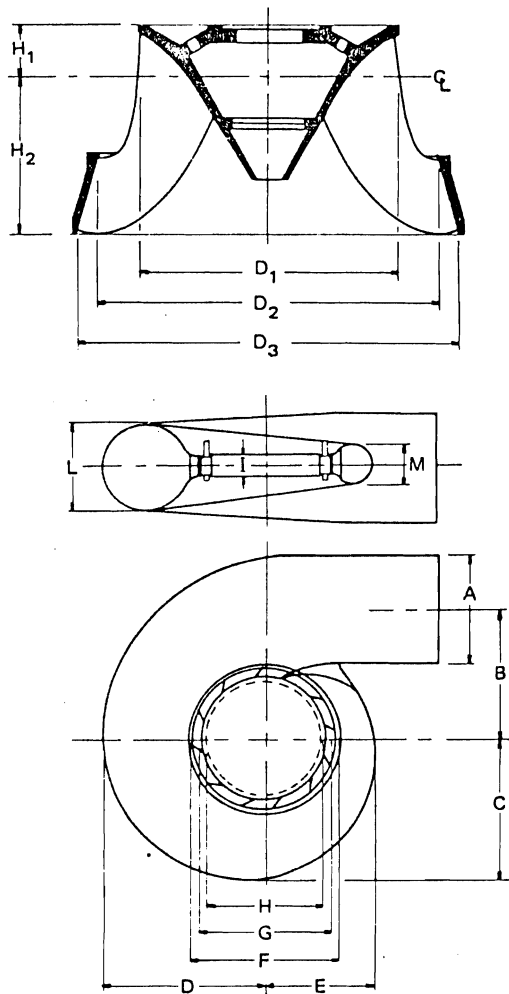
Dimensioning layout for typical steel spiral case for Francis turbines.
